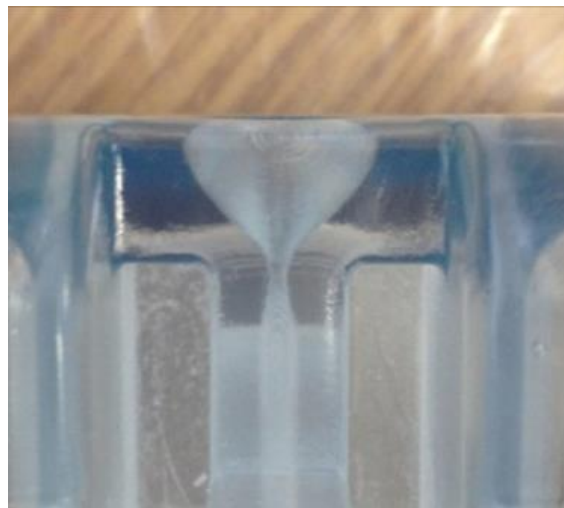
Rapid Prototyped nozzle made using Stereolithography [5]
